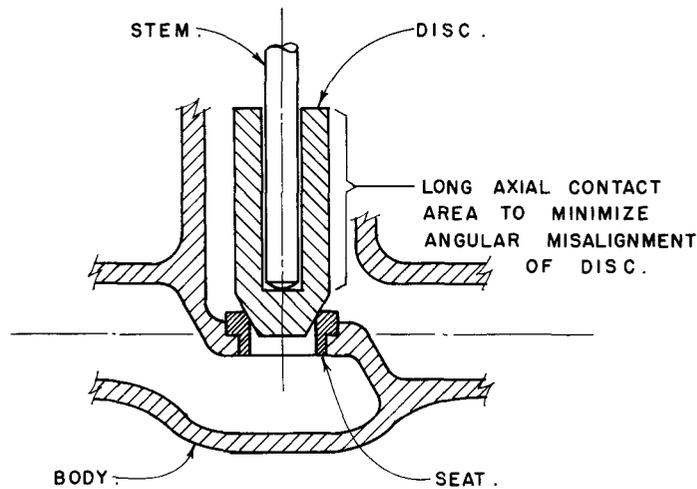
Design for Globe Valve Stem-Guided Disc (Stop Check Valve Disc Illustrated).
